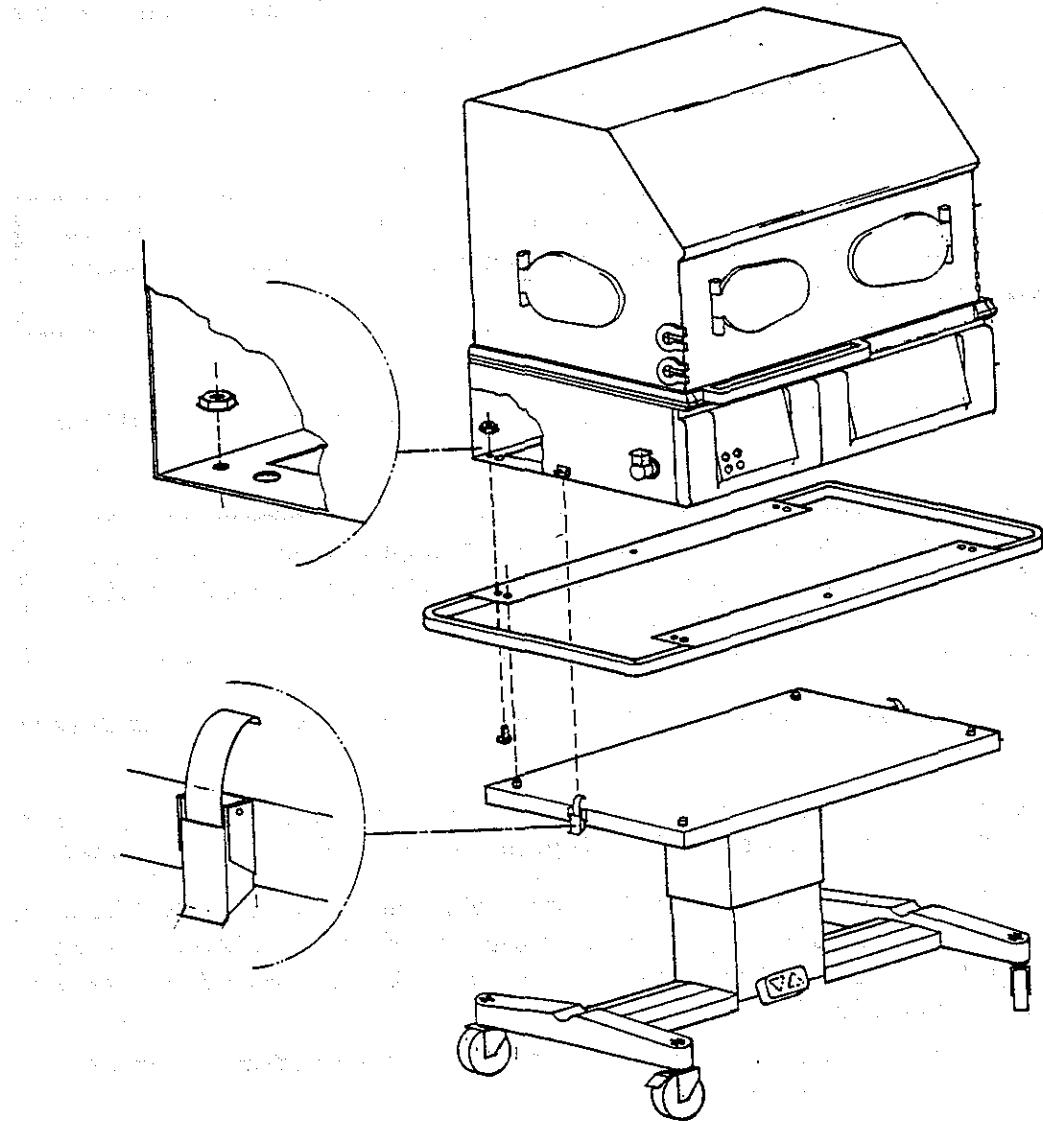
ASSEMBLY, INCUBATOR MOUNTED ON A VHA CABINET STAND
